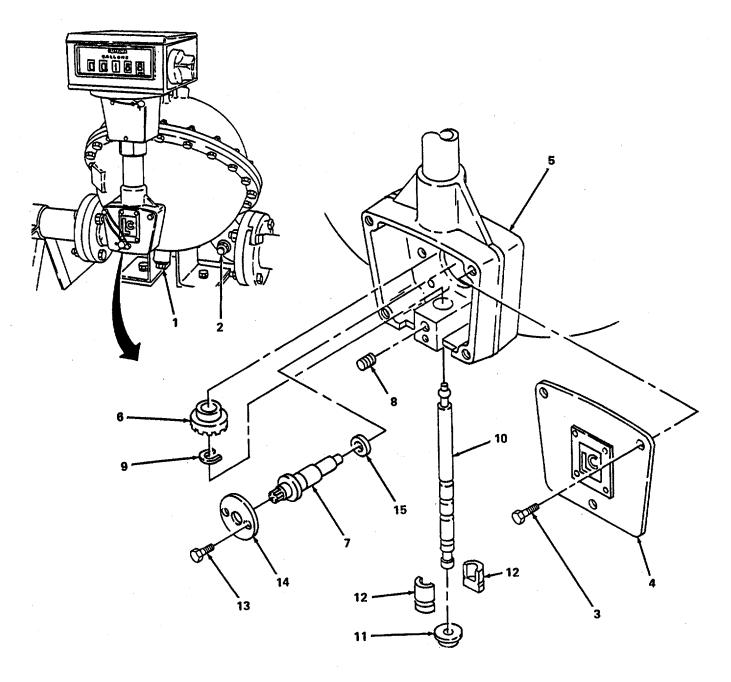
Flow Meter Packing Gland Assembly Removal.
